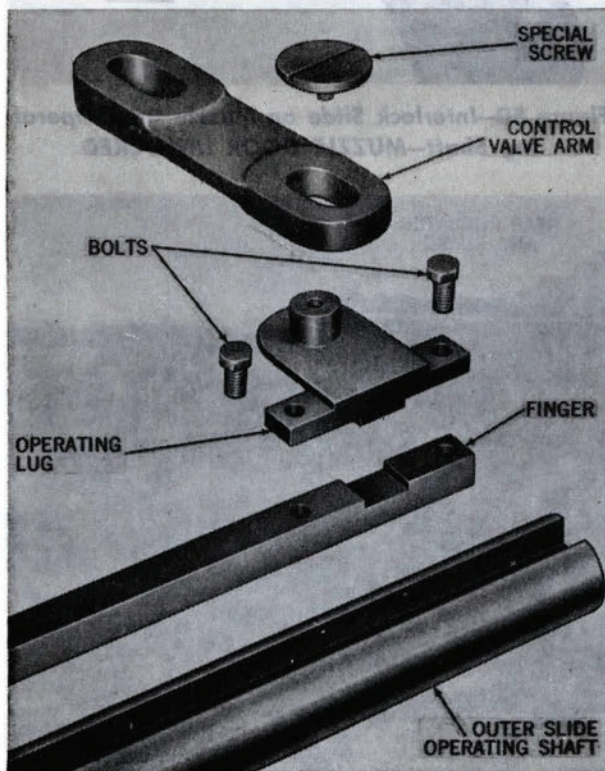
Power-Operated Muzzle Door Mechanism—Muzzle End Parts of Operating Assembly.
